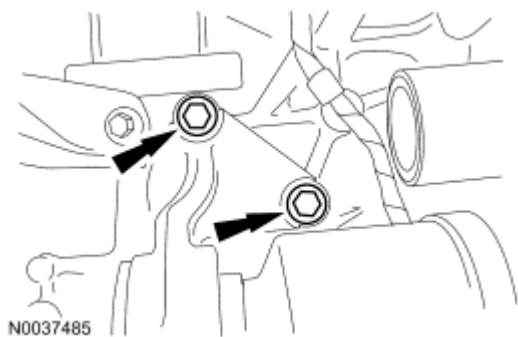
Locating RH Halfshaft Carrier Bearing Bracket Bolts
